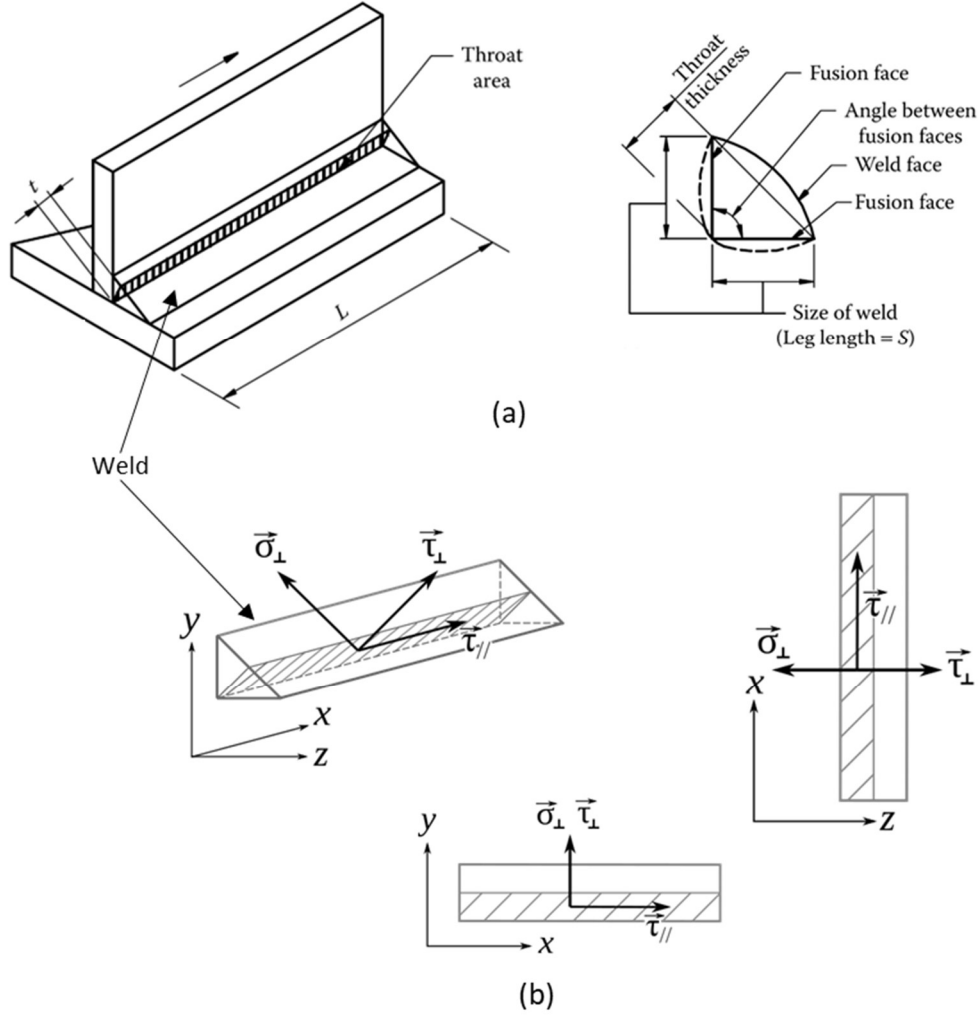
Fillet weld stress state: (a) Throat area and leg size (b) stress components in a weld
